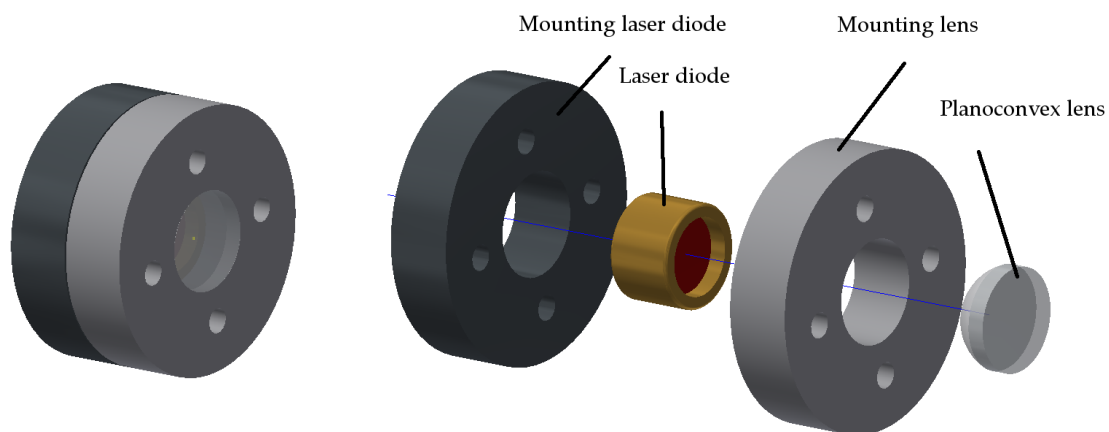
Left projection unit drawing; right projection unit exploded view drawing.
